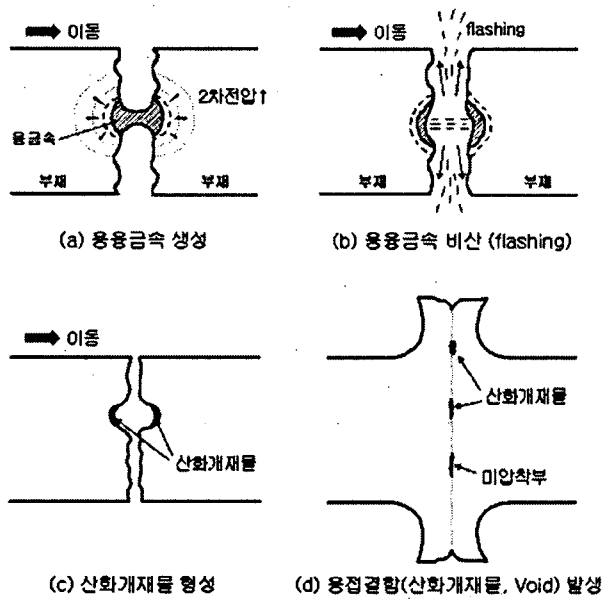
Schematic illustration of the formation of oxide during flash butt welding.
